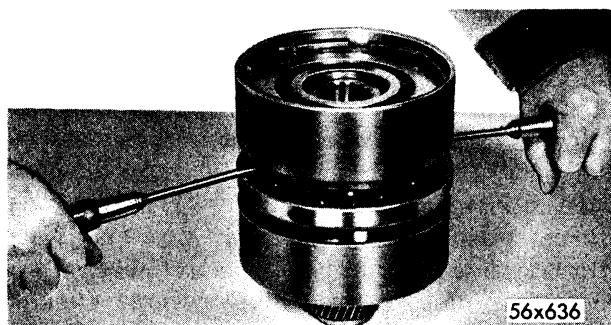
Removing Rear Clutch Piston Retainer Assembly from Sun Gear
